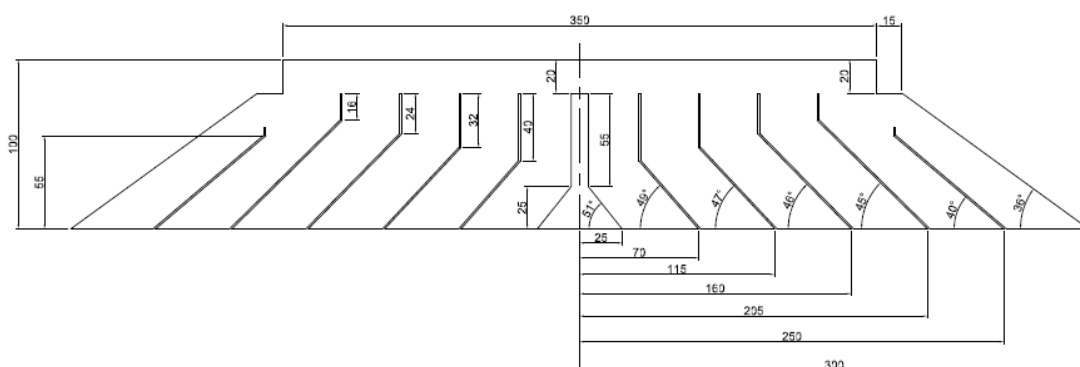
The sectional view of 4-blade ceiling air round diffuser with an average blade angle of 40°
